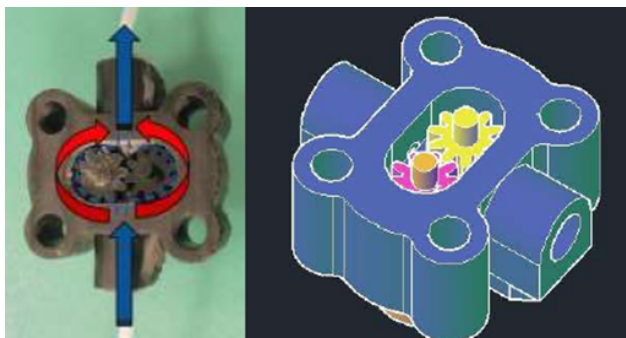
Gear pump prototype and design made with DLP 3D printer.
